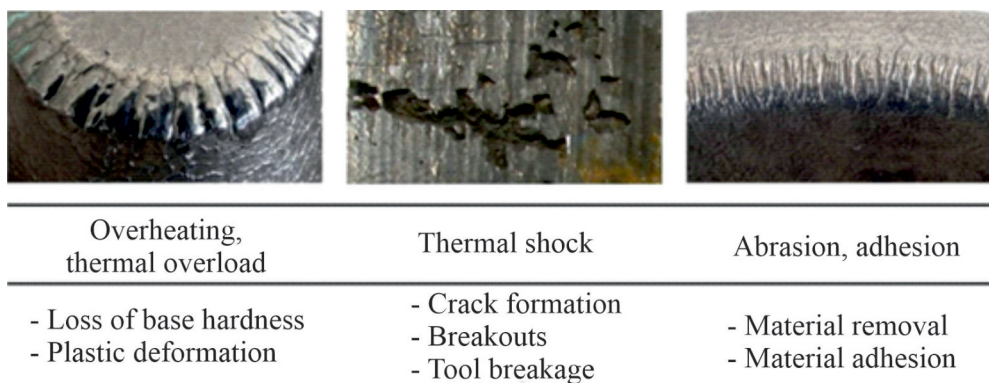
Typical damage mechanisms in forging tools leading to tool failure [8].
